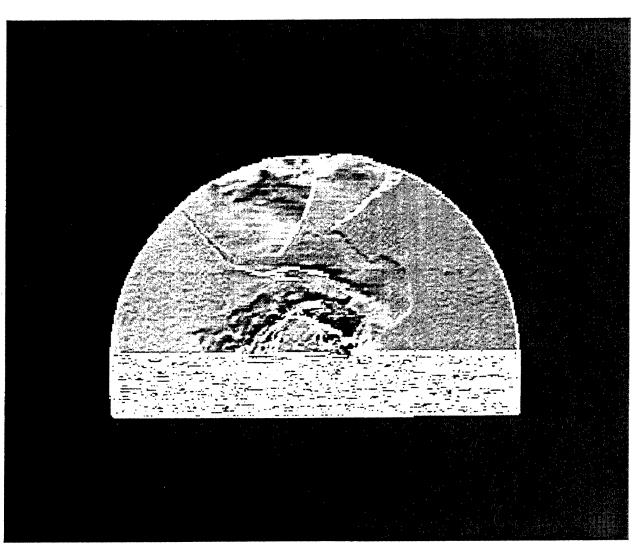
24.57 mm from bottom of disk with 65° rotation about X-axis.
